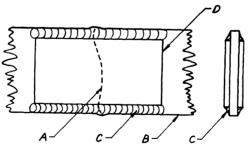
A fractured spring steel part repaired by brazing: A. the fracture, B. the original part, C. the brazed, D. the reinforcement part
